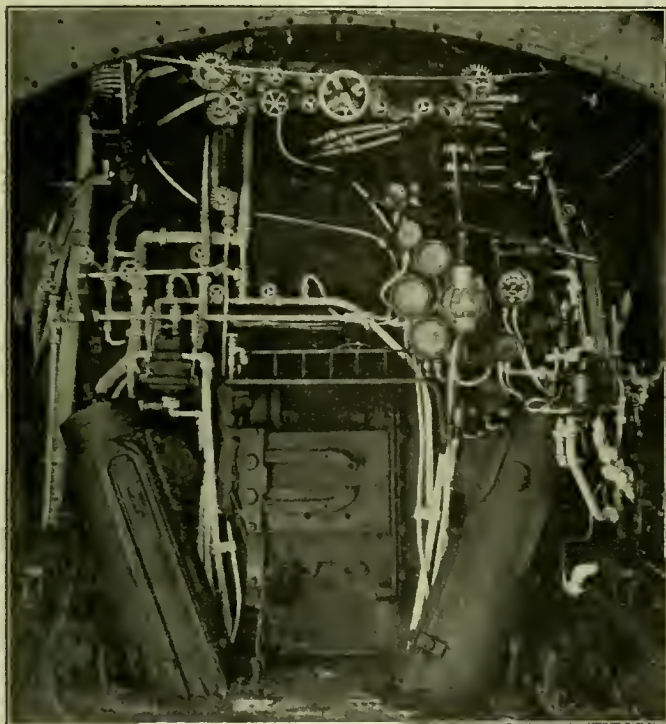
Location of Boiler Back Head Fixtures in Large Locomotive
